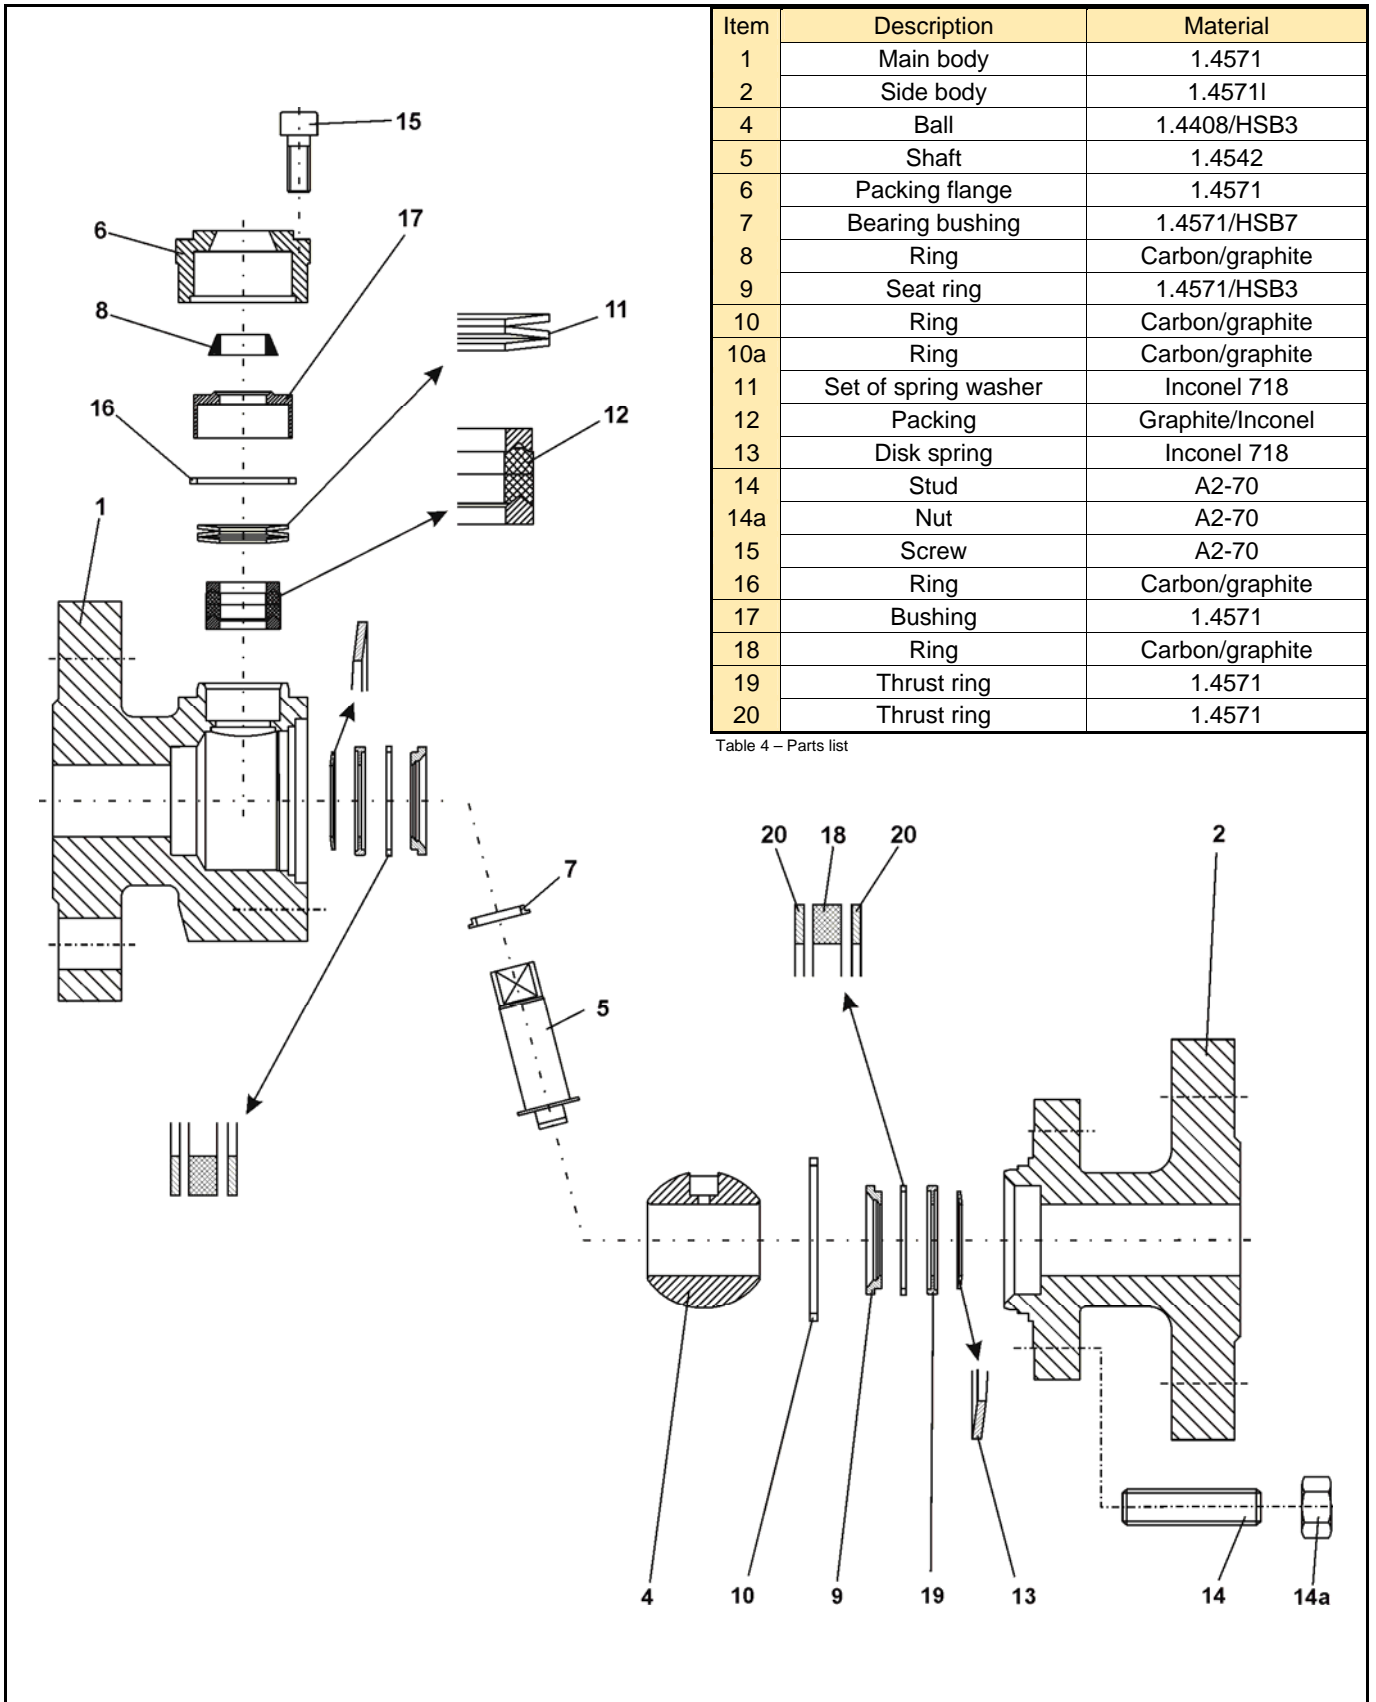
Detail drawing high-temperature Series 26a Ball Valve
